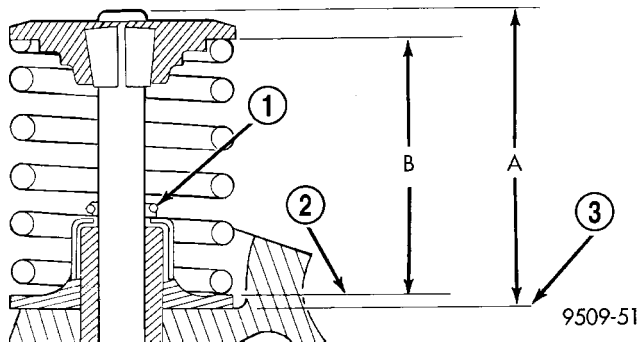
Checking Spring Installed Height and Valve Tip Height Dimensions
